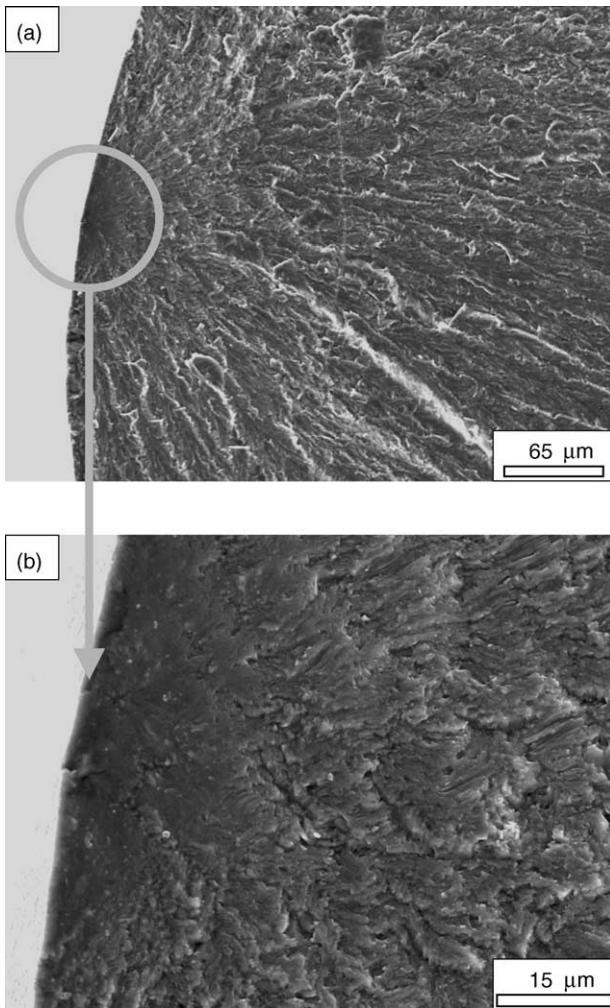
Fracture surface of a C3 specimen broken at 1.48 GPa. (a) Low magnification, (b) high magnification, showing the surface defect which nucleated the fracture.
